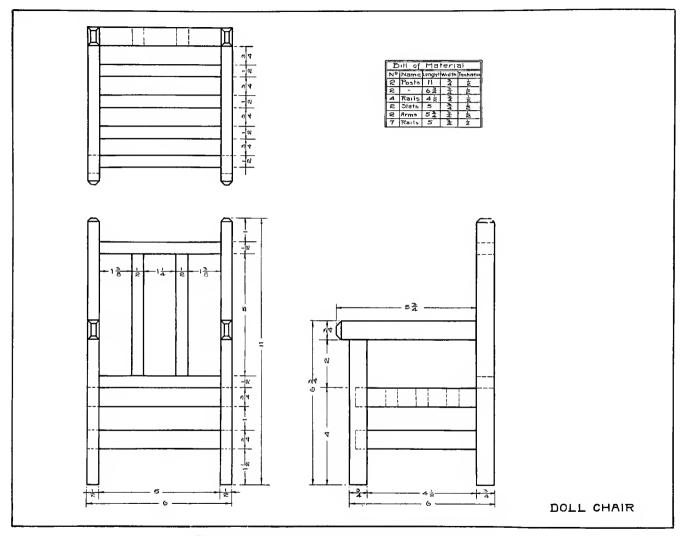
Working Drawing of Doll Chair (Sixth Grade)
